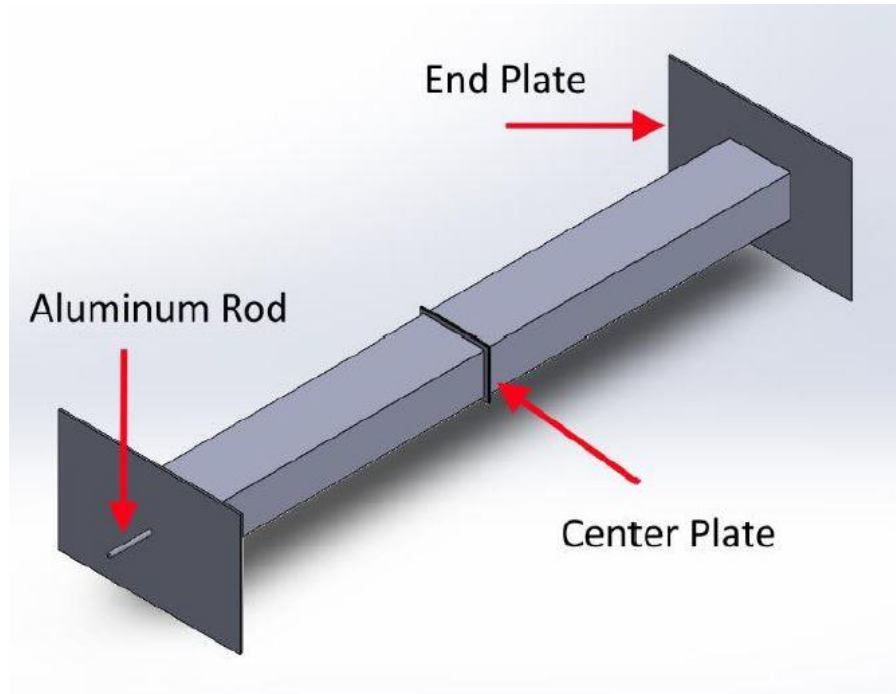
CAD drawing of Rectangular section ( $B/D = 1.5$ ) assembly
